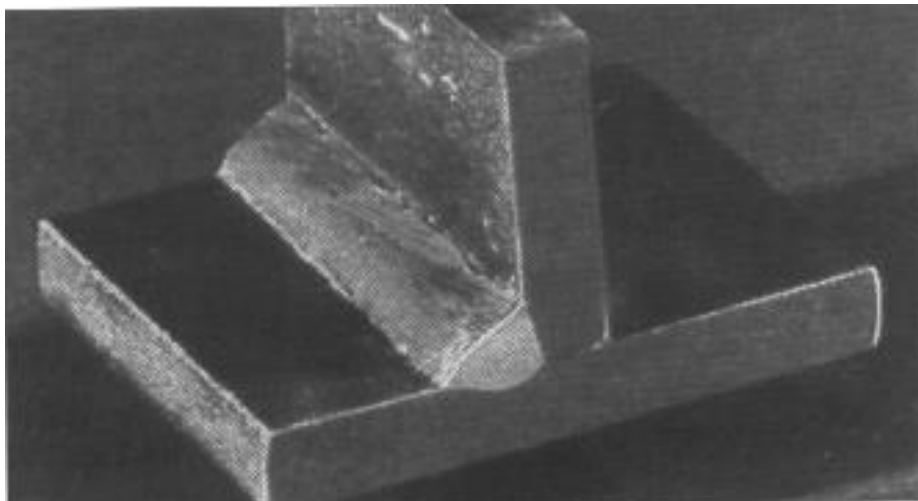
Fillet weld welded with RAPID ARC
